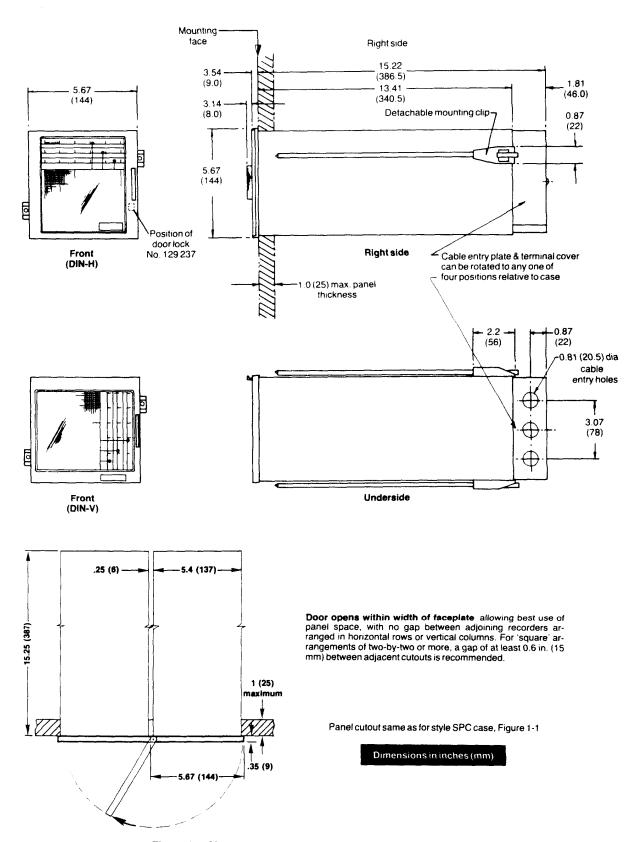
Model 301 dimensions Case style DIN-H and DIN-V
